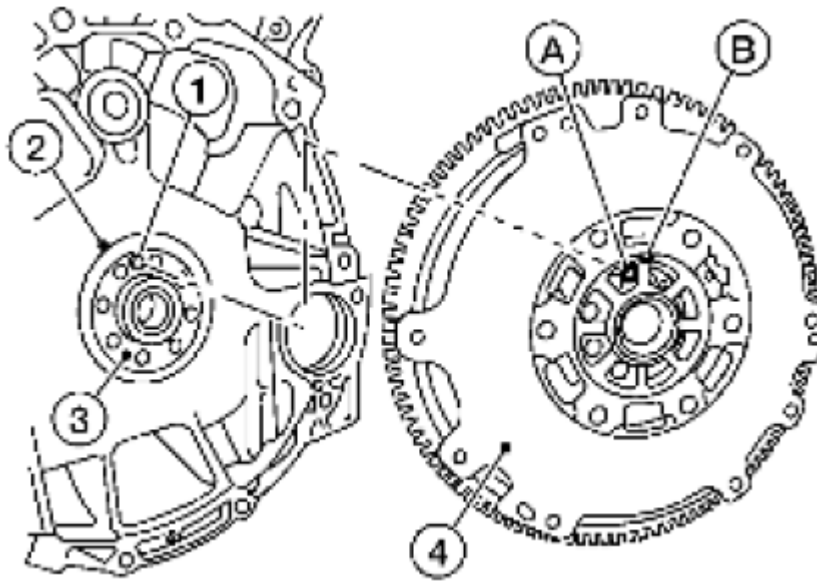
Identifying Locator Mark On Clutch Cover Side
